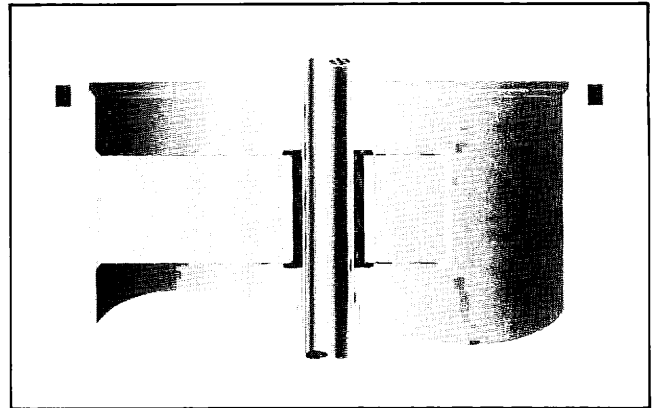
Open Lineshaft Bearing Welded Configuration
